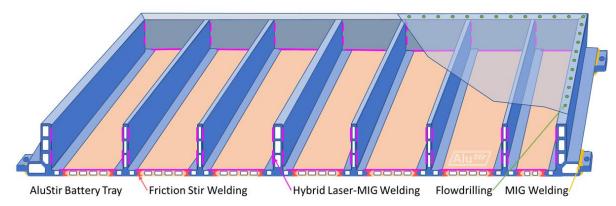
AluStir aluminium battery tray to be produced by four processes: FSW (red), hybrid Laser-MIG (magenta), flowdrilling (green) and MIG welding (yellow) © AluStir
